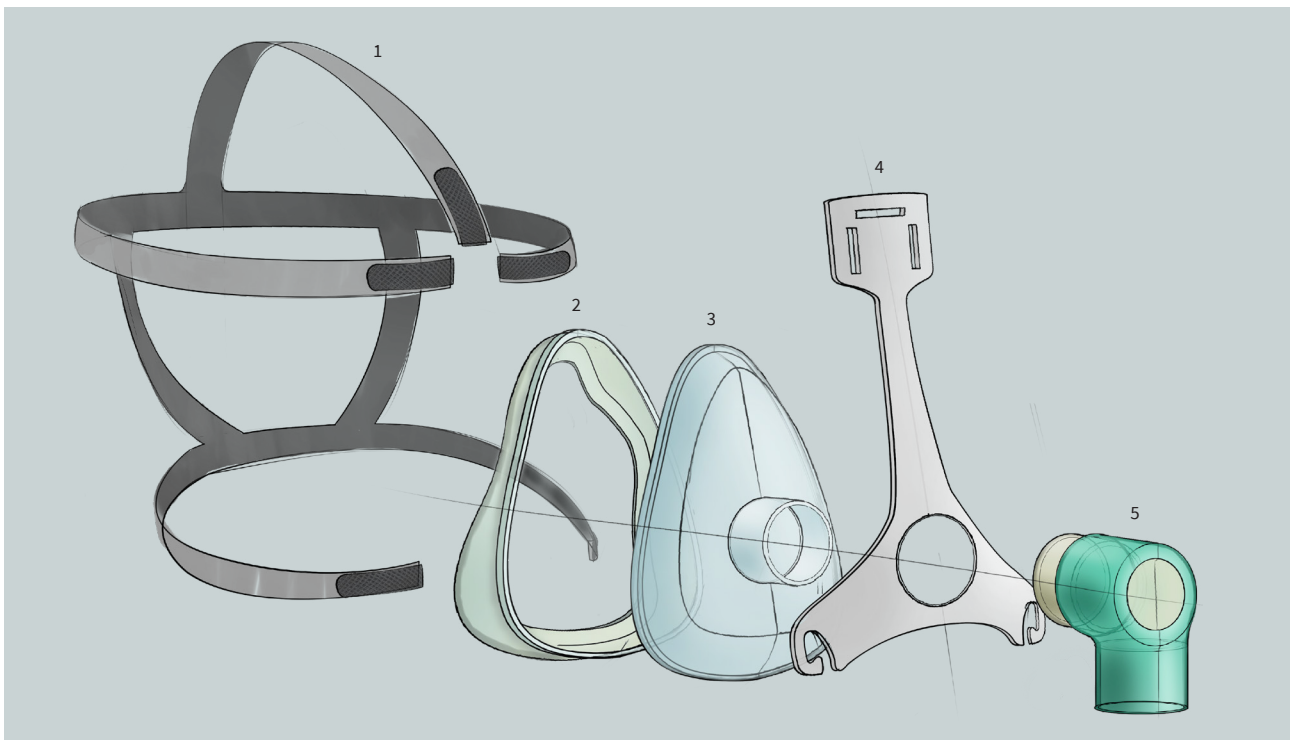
Parts of the Modular Mask, (1) headgear, (2) cushion, (3) frame, (4) holder, and (5) swivel.
